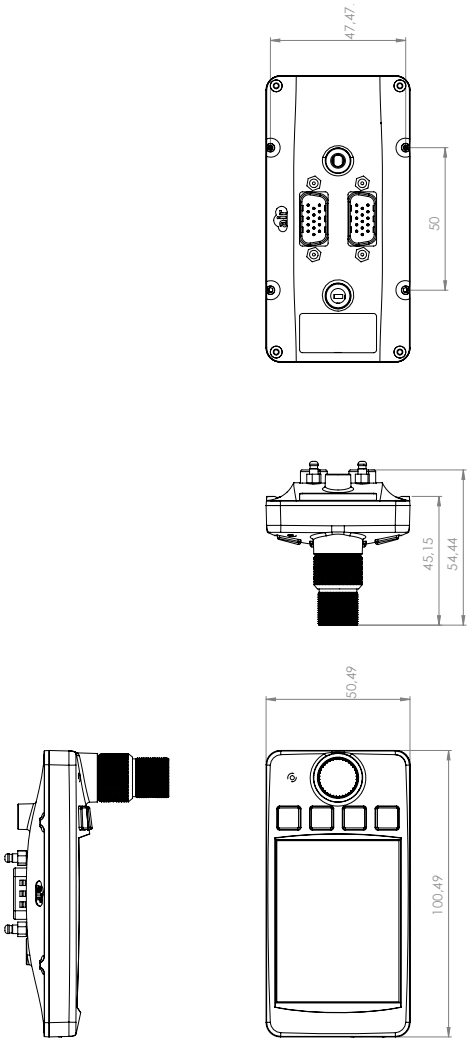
Dimensional drawing ATD-11, all dimensions in millimeters
